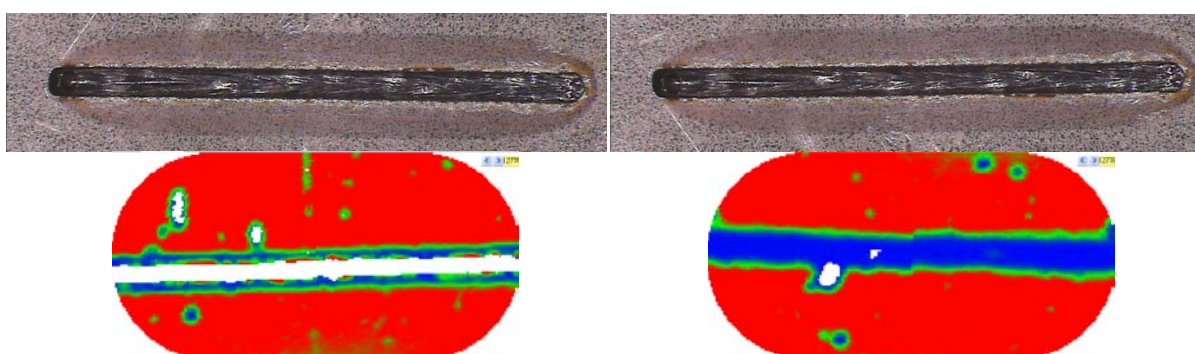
Weld top bead (0.2mm gap, sample A) and Amstech result from top bead (L) and bottom bead (R)
